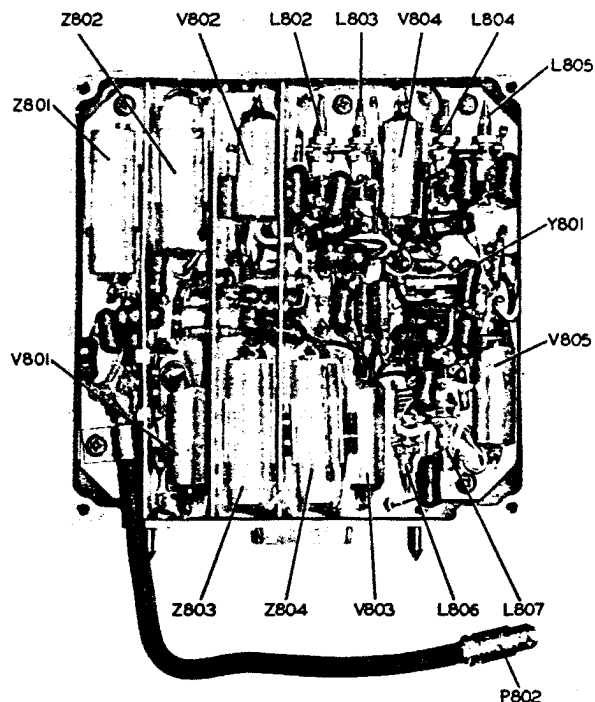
Guard Receiver, Rear View, Cover Removed
